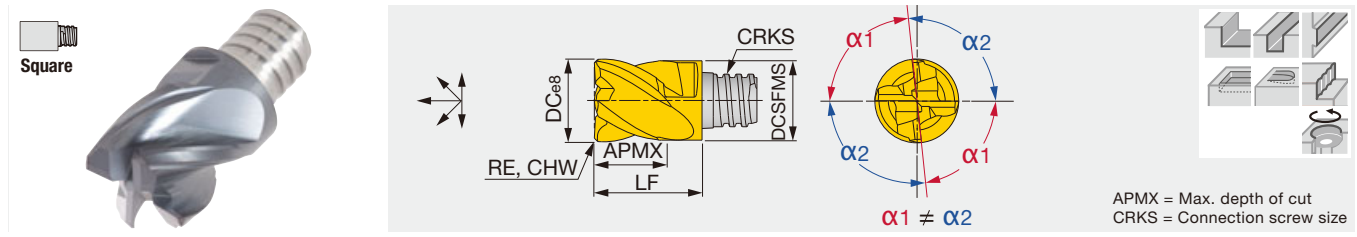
Avoid interference with workpiece when using this cutting head. The shank diameter is larger than the cutter diameter when assembled.
